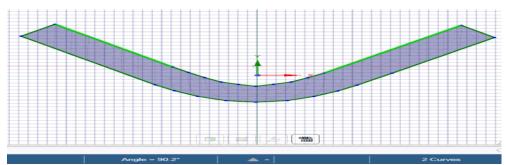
Measurement of springback angle after bending of 5mm sheet in 35milimeter die opening and 0 holding time.
